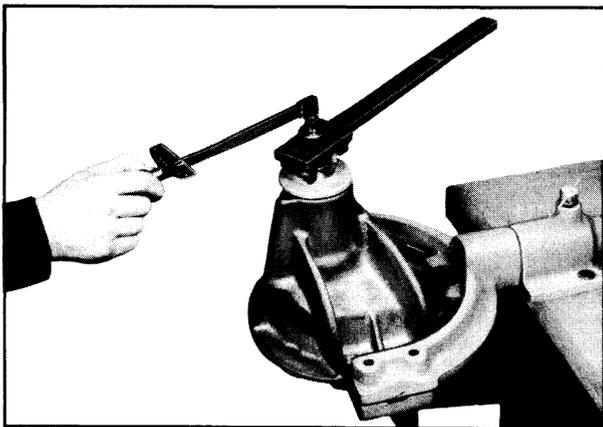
Measuring Bearing Preload With Torque Wrench
